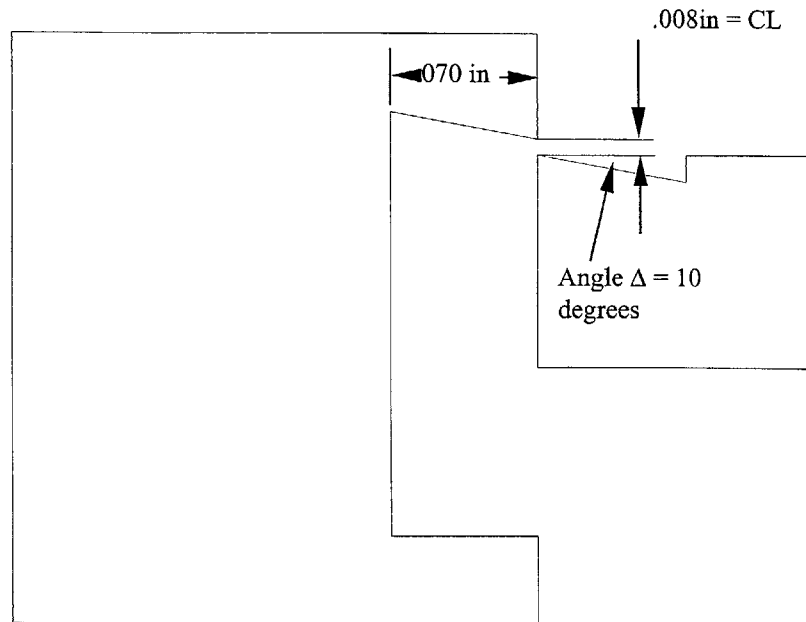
(This shows a close-up view of the new latch geometry and how the edge to edge clearance value is calculated. Again, this is representative of the rolling piston at top dead center.)
